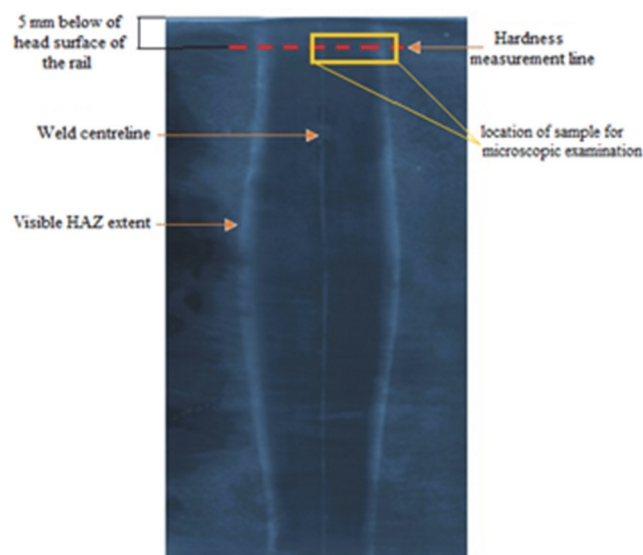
Macrograph of a vertical longitudinal section through the welded joint of the tested rail with the marked position of the measuring line for hardness testing and the place of sample sampling for microscopic tests. Magnification 1:2
